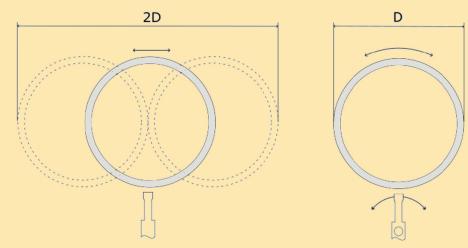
Top view of the machine concept. Standard concept of conventional machines (left) and novel concept of the MF-400 CNC (right).
